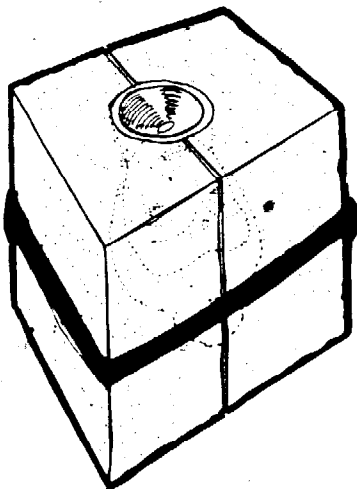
The rubber mould, clamped inside the plaster backing and ready for use.
